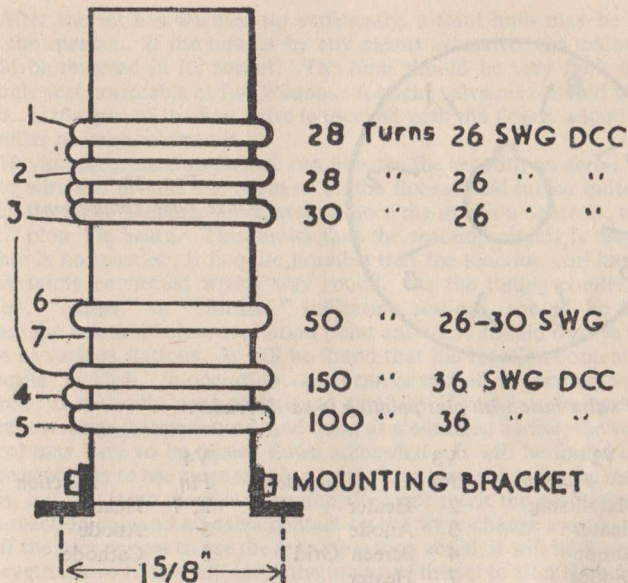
A. Winding details of coil, and of mounting brackets. The coil connection reference numbers (1-7) correspond with those in Fig. 29.
